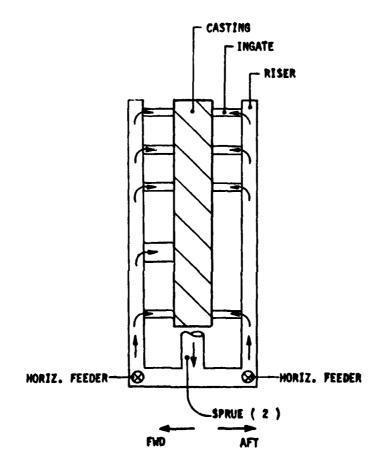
POURING SYSTEM BOEING PART A AND B CASTINGS
